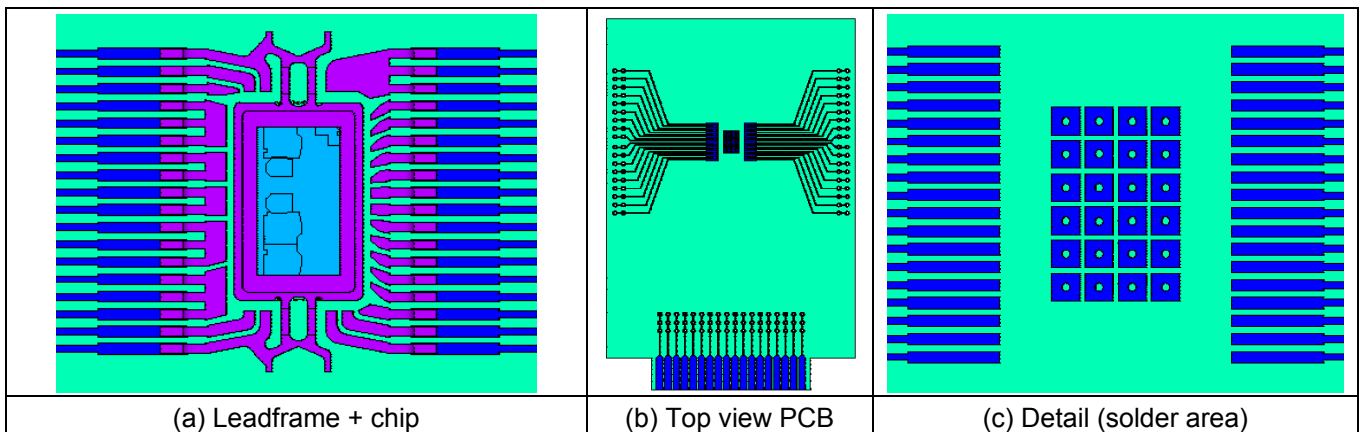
Schematic of the Leadframe and JEDEC PCB Used for ePad Package
